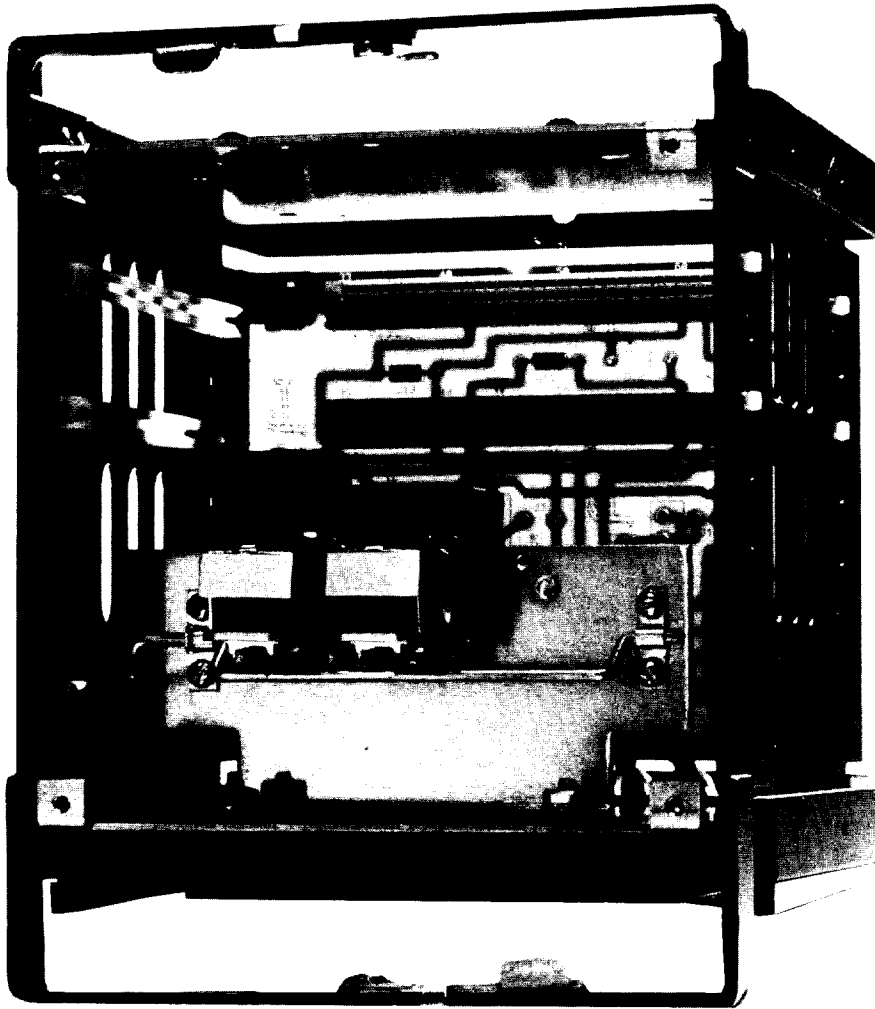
(8043824) Typical "S1" Cradle Assembly With Nameplate and Circuit Boards Removed
